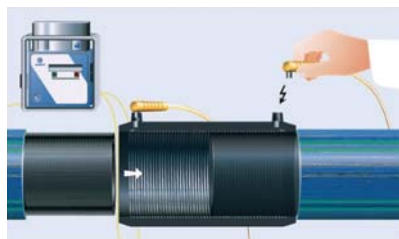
Welding in accordance with DVS 2207, Part 1
